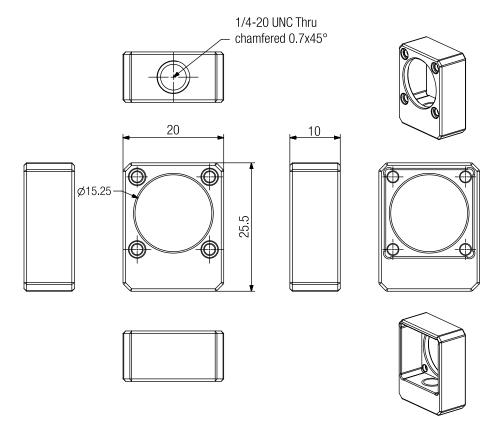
Dimensional drawing of ME-ADPT-MU-17x17-T-KIT
